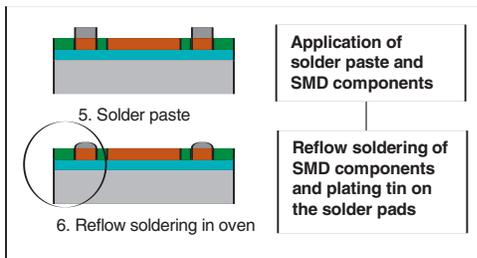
Steps 5 & 6, Solder Pad Preparation and SMD Component Mounting.
